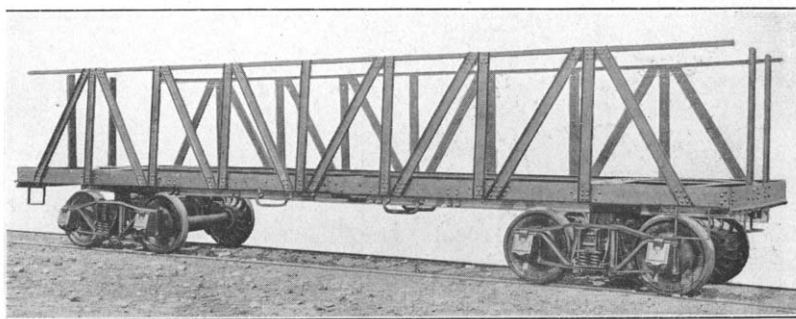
shows the steel framing before the application of the wood floor and lining as viewed from the side.
